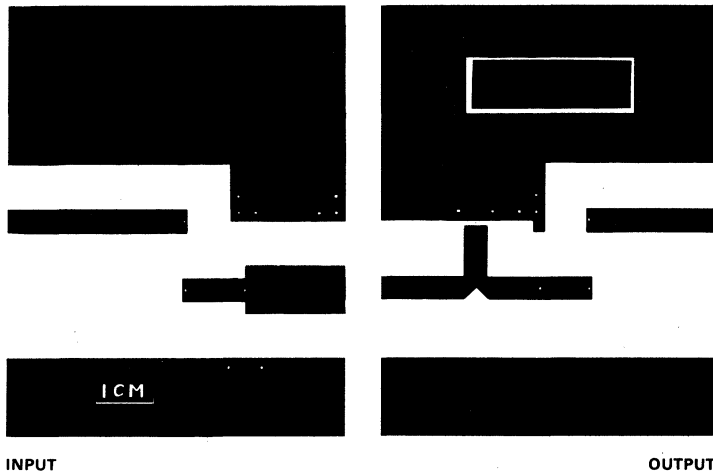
PRINTED CIRCUIT BOARD LAYOUT
